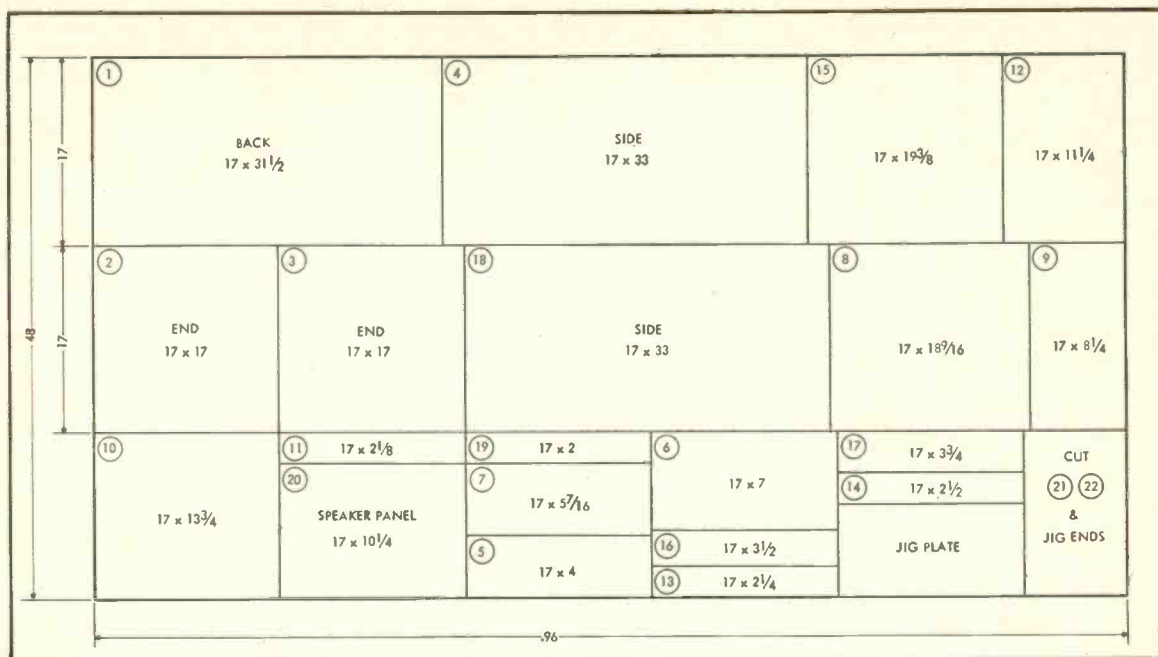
Layout for cutting a single sheet of $\frac{3}{4}$ inch plywood into the necessary individual pieces for construction of the CW Horn.
